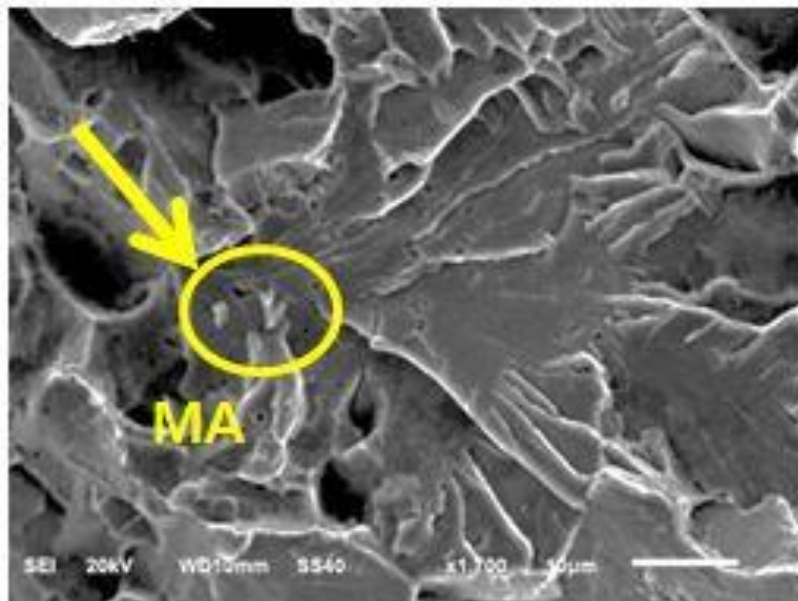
Fractographs of Charpy impact specimen (EG-C15, MA constituents)
